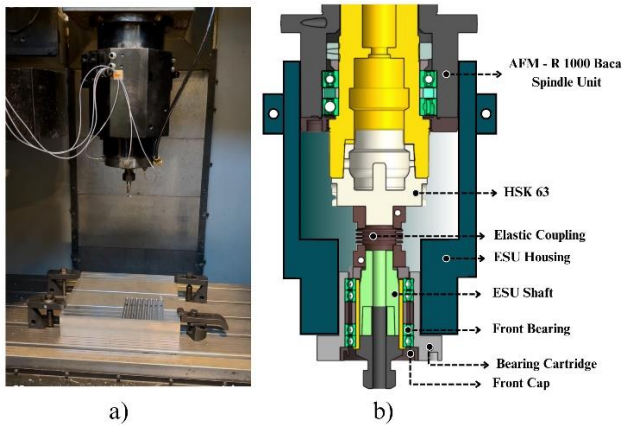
a) Machining setup. On top the exchangeable spindle unit (ESU) mounted and clamped to the machine tool spindle nose, the accelerometers connected and the blank clamped to the machine table. b) ESU components in CAD cross section view.
